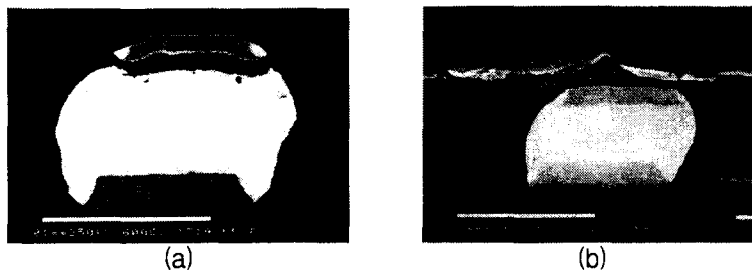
Flip Chip Failure Modes (a) Crack between chip-side UBM and solder (b) Si cratering
